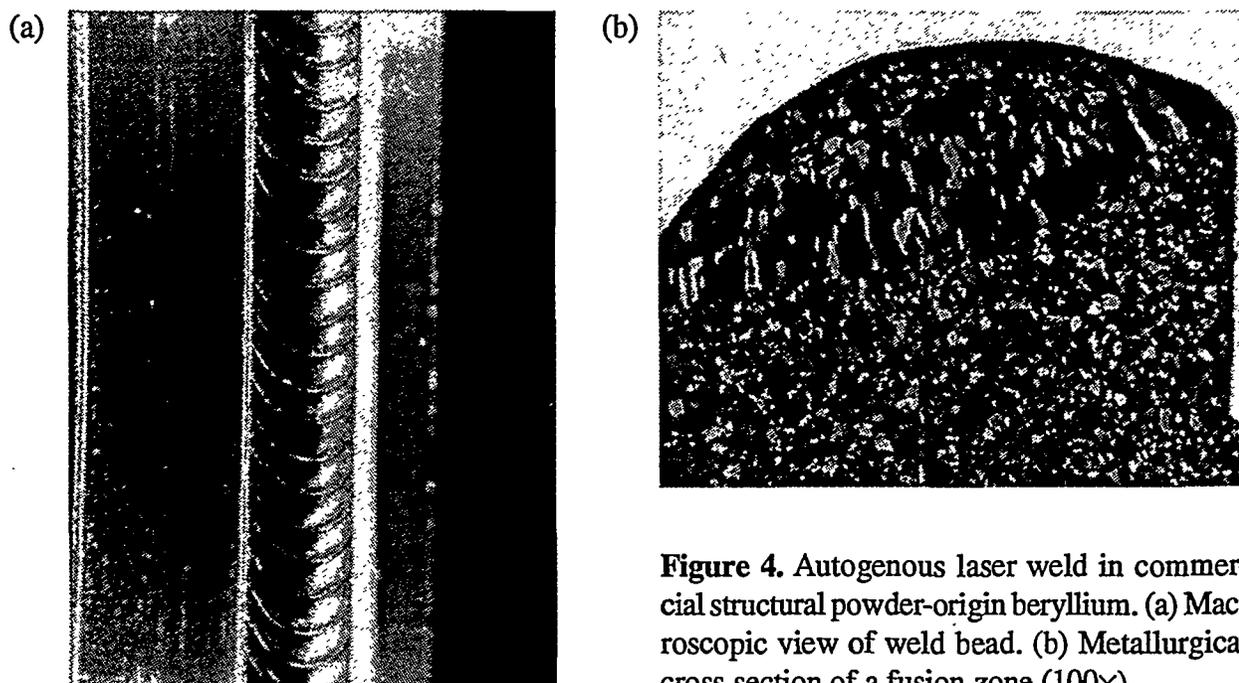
Autogenous laser weld in commercial structural powder-origin beryllium. (a) Macroscopic view of weld bead. (b) Metallurgical cross section of a fusion zone (100 $\times$ ).
